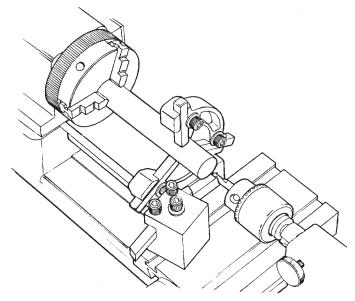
To drill a hole in the end of a long shaft, the lathe is set up with a center drill in the drill chuck which is mounted in the tailstock. The steady rest keeps the shaft from wobbling and also assures that the hole will be concentric with the outside diameter of the part.
